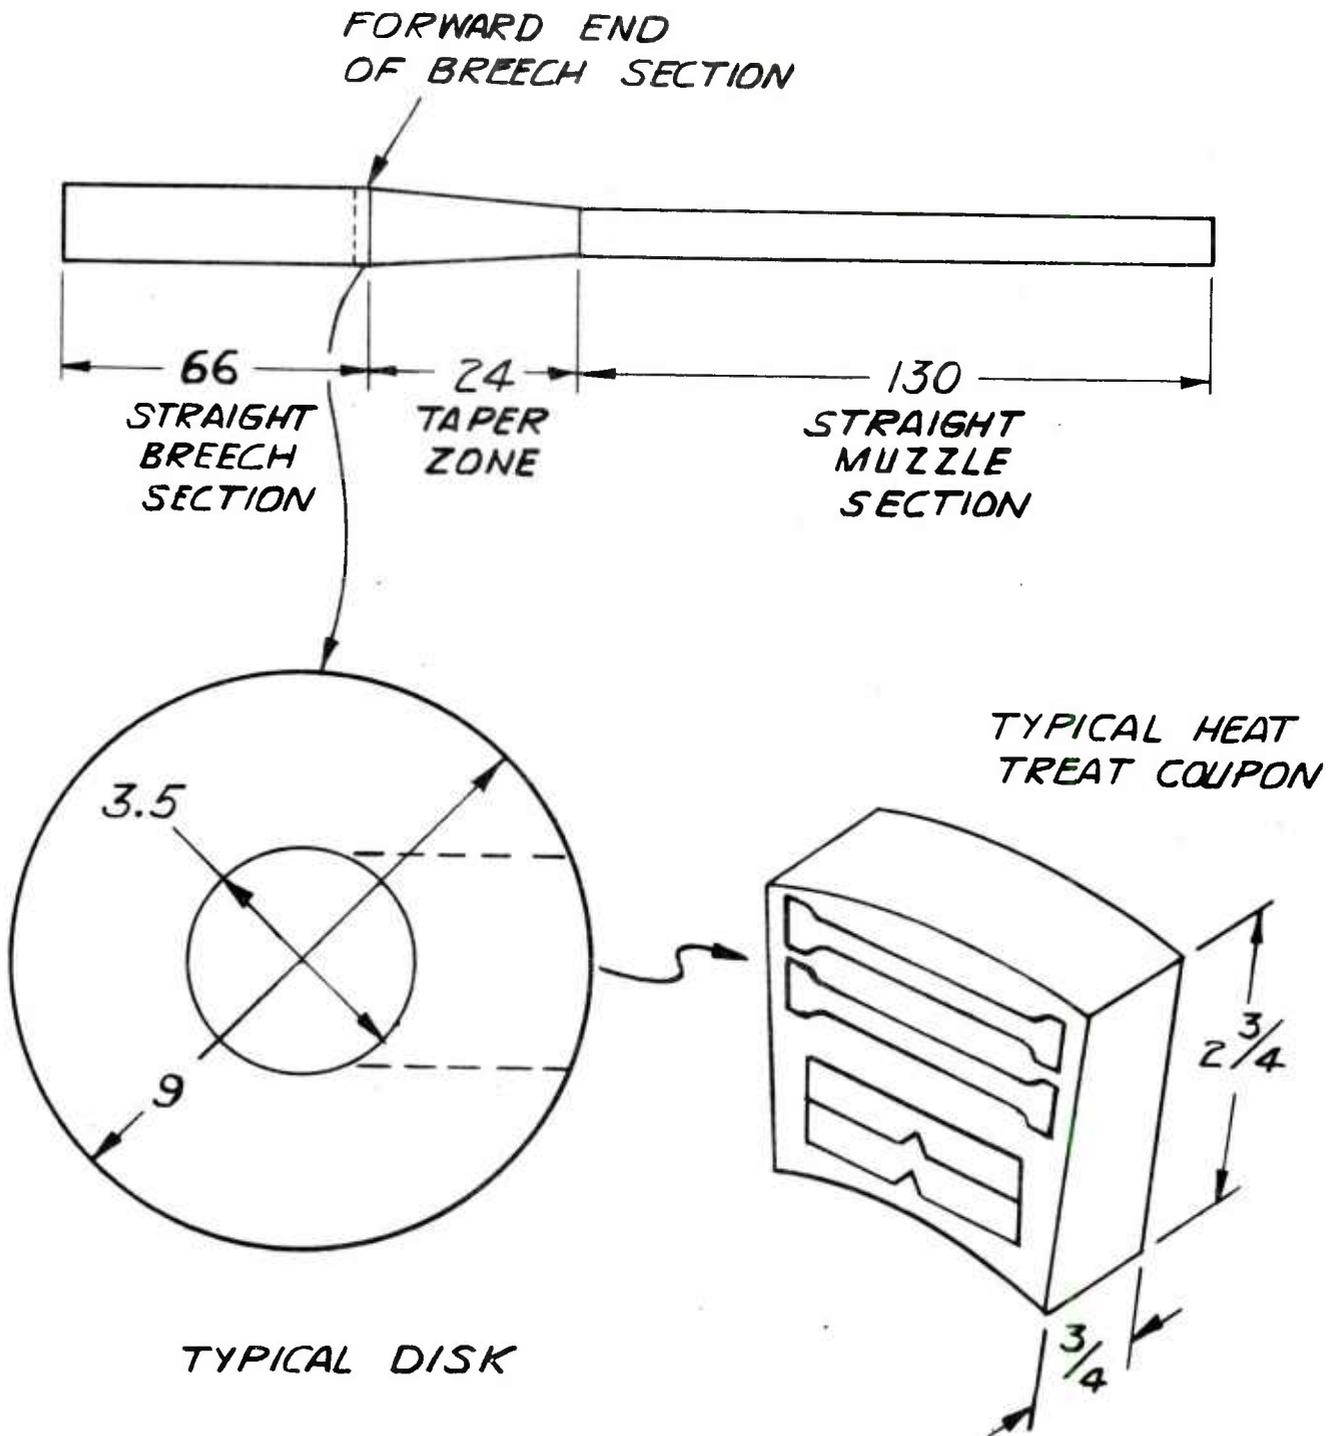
Schematic showing 105mm M68 gun tube forging with layout for heat treat specimens. Dimensions in inches.
